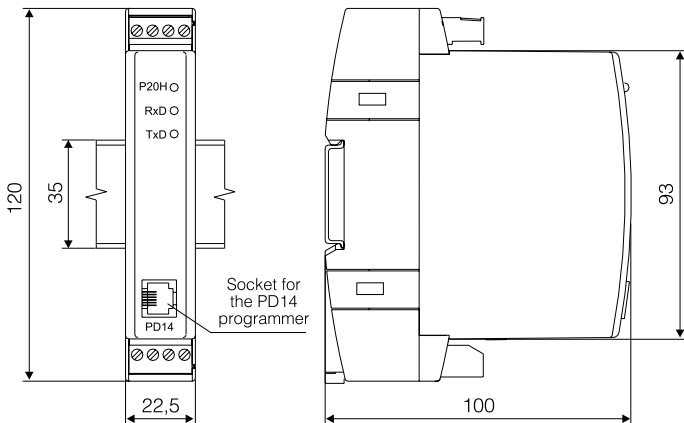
Overall dimensions and fixing way of the P20H transducer
